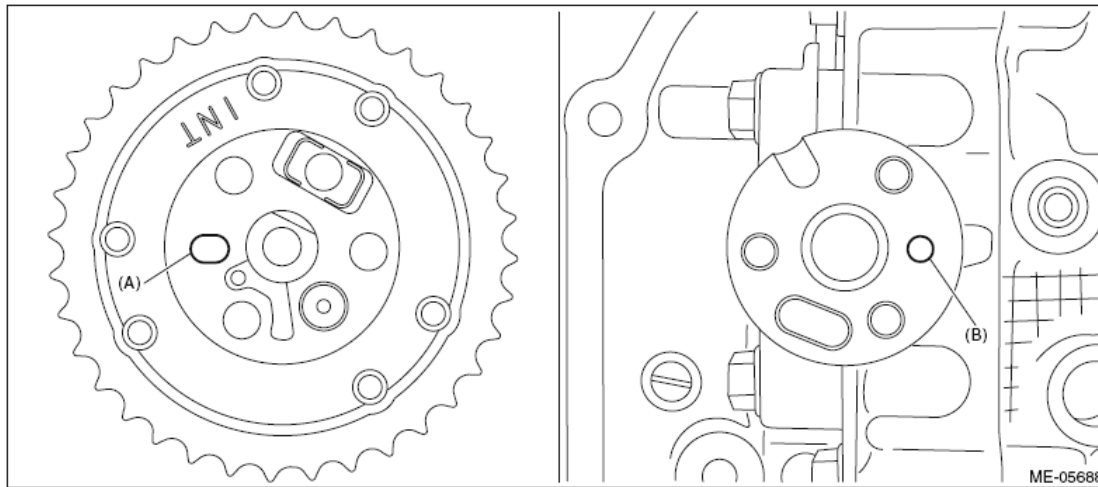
Identifying Knock Hole Of Intake Cam Sprocket And Knock Pin Of Intake Camshaft
